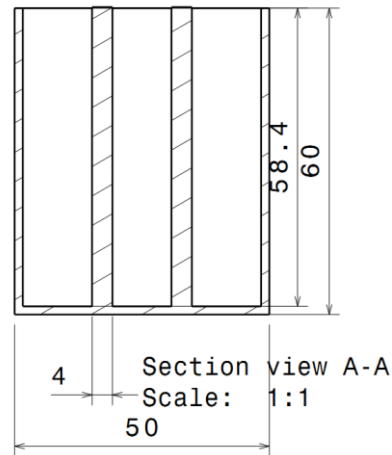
Sectional View of Heat Sink with 2 fins of Fin Thickness 4 mm and Fin Height 60mm.
